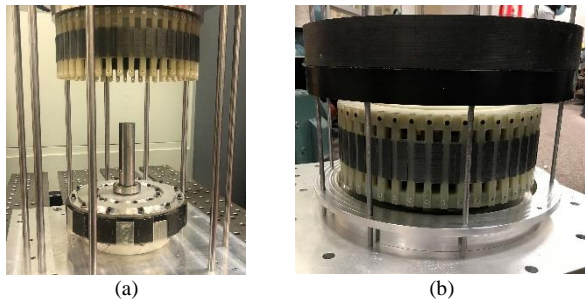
(a) Inserting cage modulator over inner rotor and (b) Inserting outer rotor over fixed cage modulator assembly.
